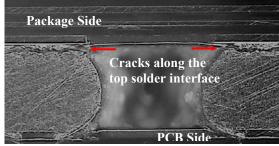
Cross-sectional View of Cracked Solder Joints in the HP-fcBGA Package.
